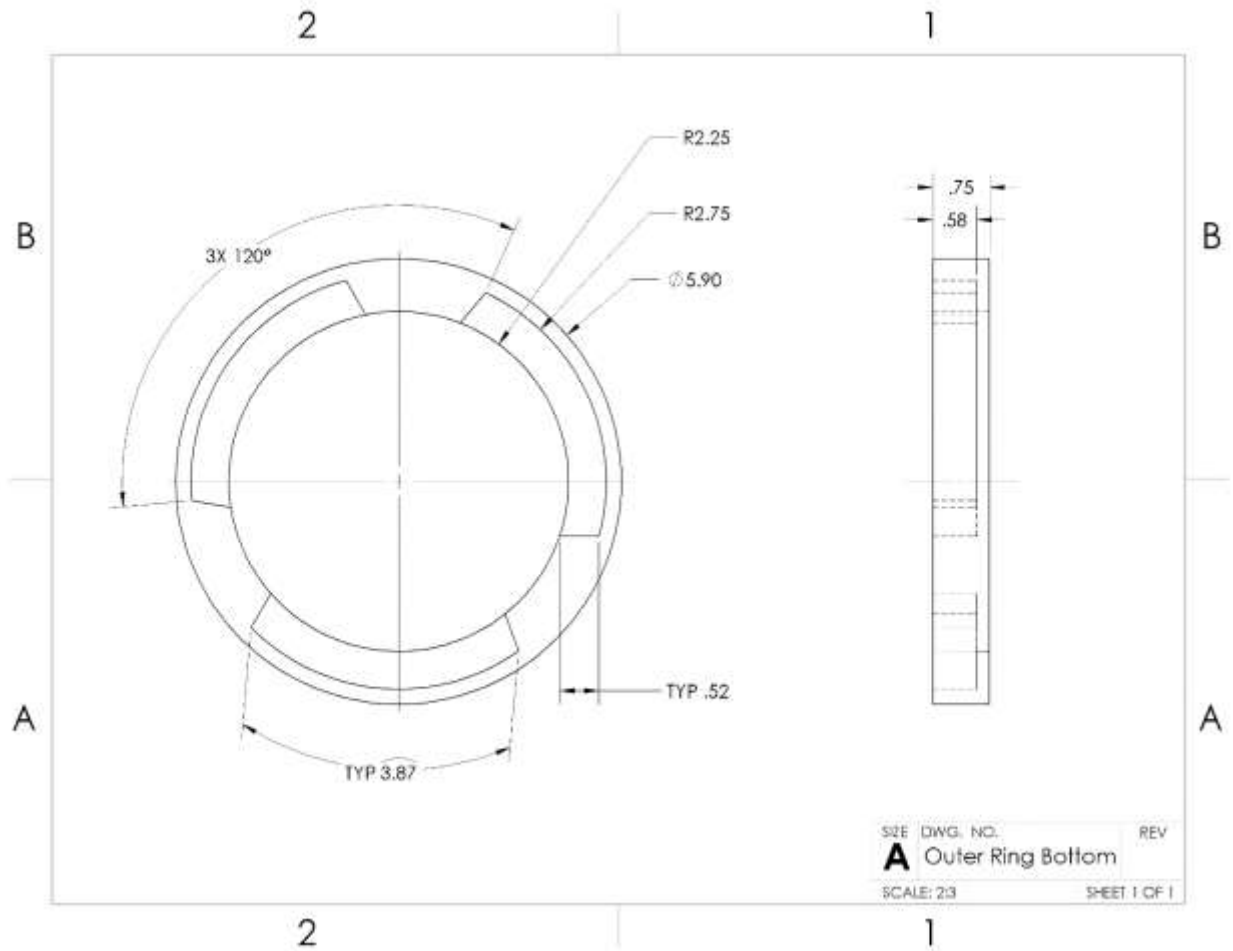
Locking Mechanism Outer Ring Bottom Drawing
